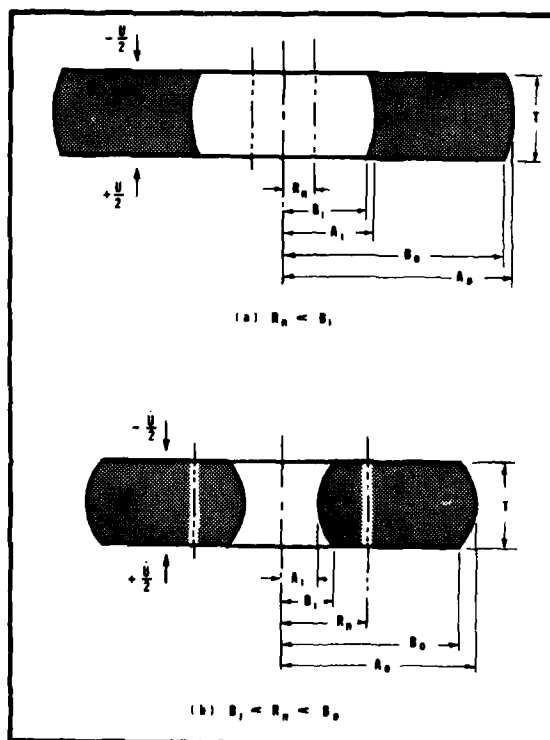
Schematic Representation of the Ring Geometry after Forging
